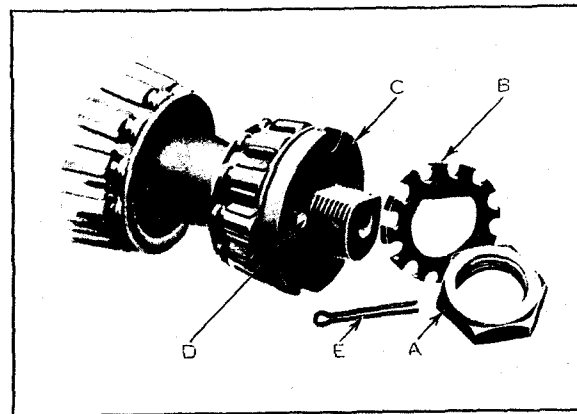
Front Wheel Bearings and Adjusting Nuts.
